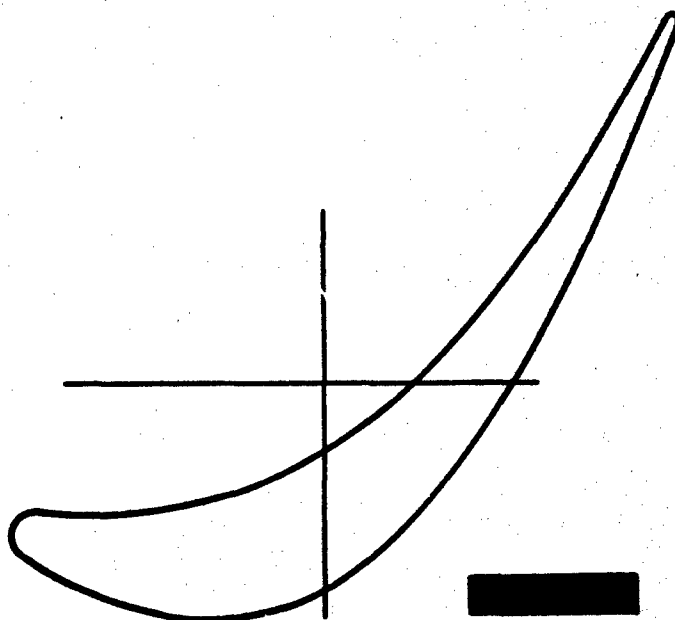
Section D-D, First Vane 1/4 Tip, Planar
